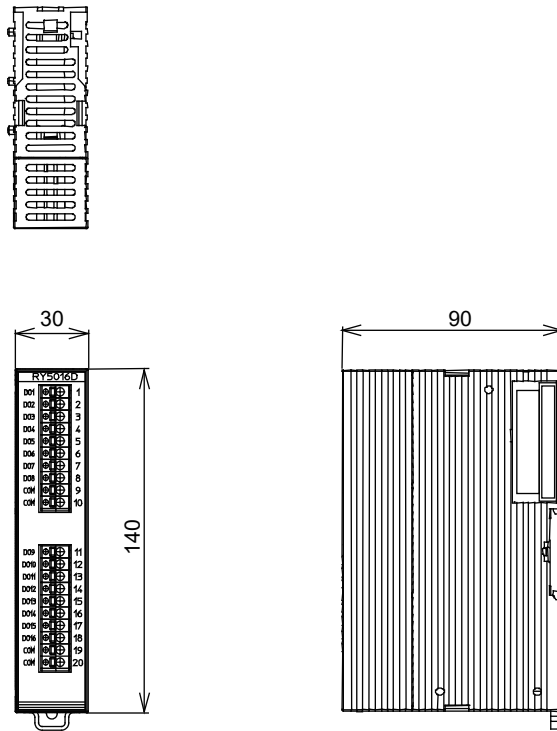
Dimensions of the I/O module Model RY5016D (mm)
